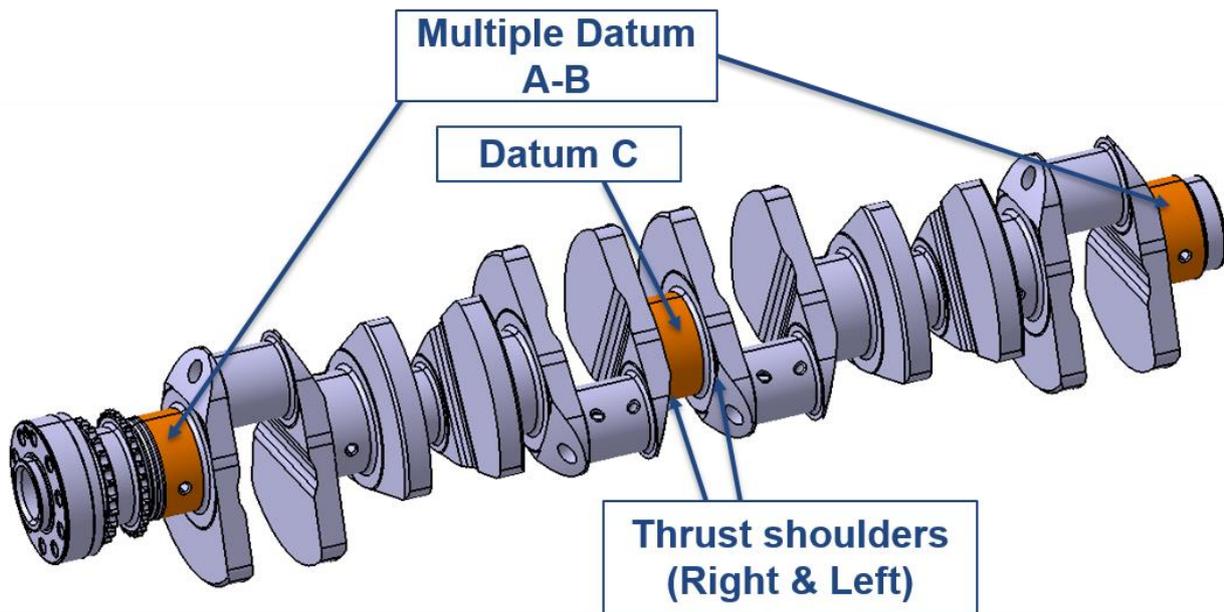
Crankshaft DRFs: Multiple Datum A-B and Datum C
